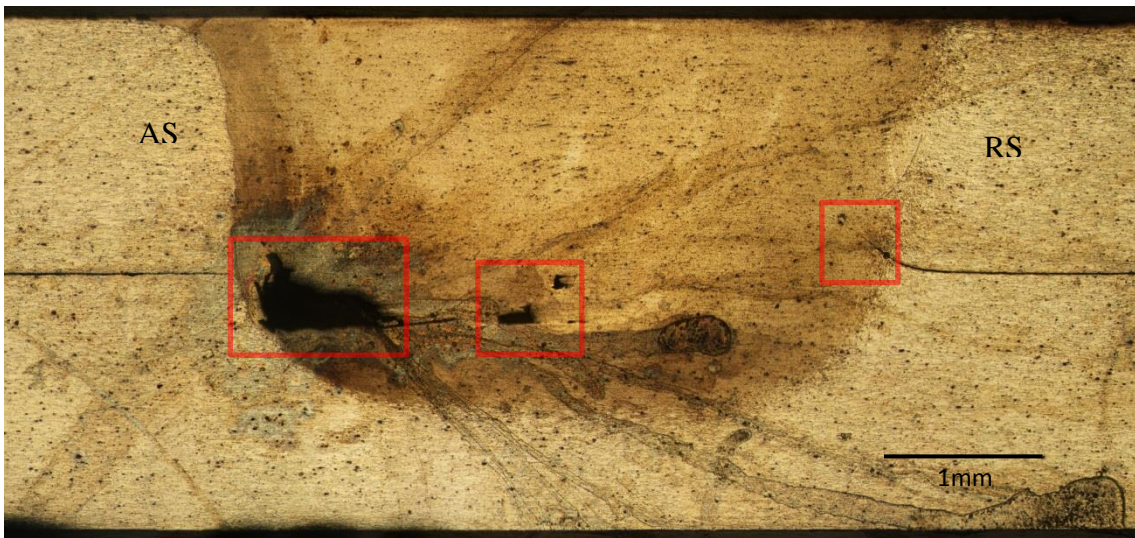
Metallographic picture of SSFSW #3760A welding sheet cross section at -1200 rpm, 8.47 mm/sec, 9.79 kN tool 1(RH)
